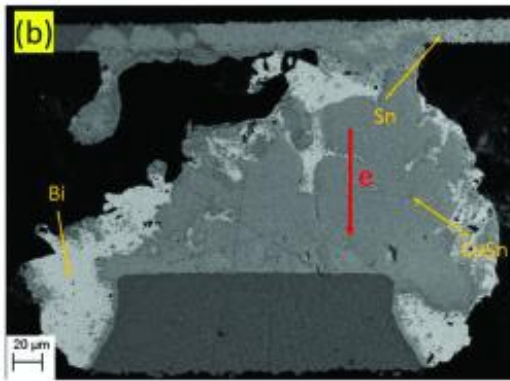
Solder joint failure due to electromigration [2].
